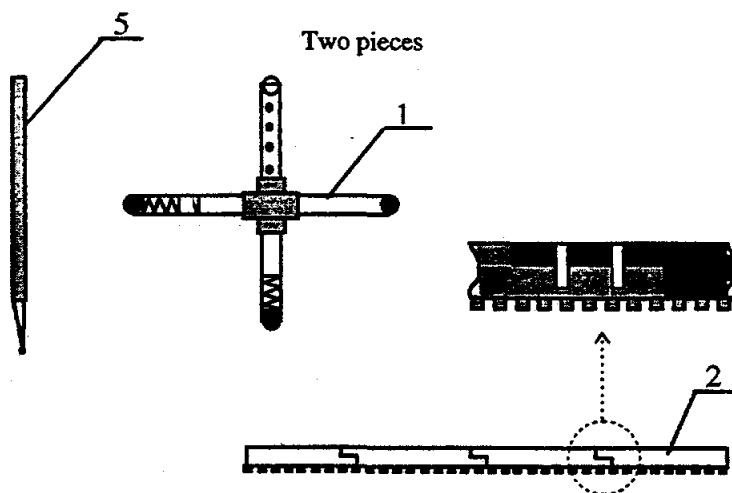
Details of the Support, Particle-holding Rod and Measuring Rod
